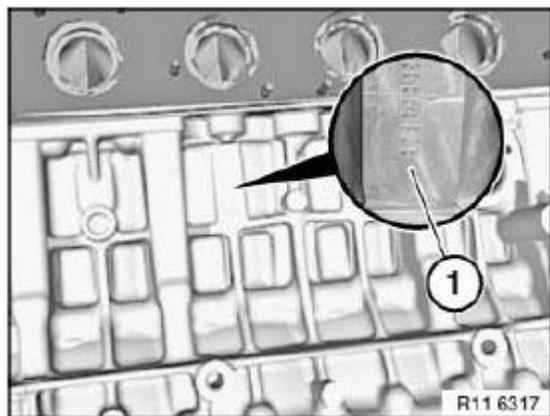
Identifying Bearing Classification Of Crankcase Upper Section
